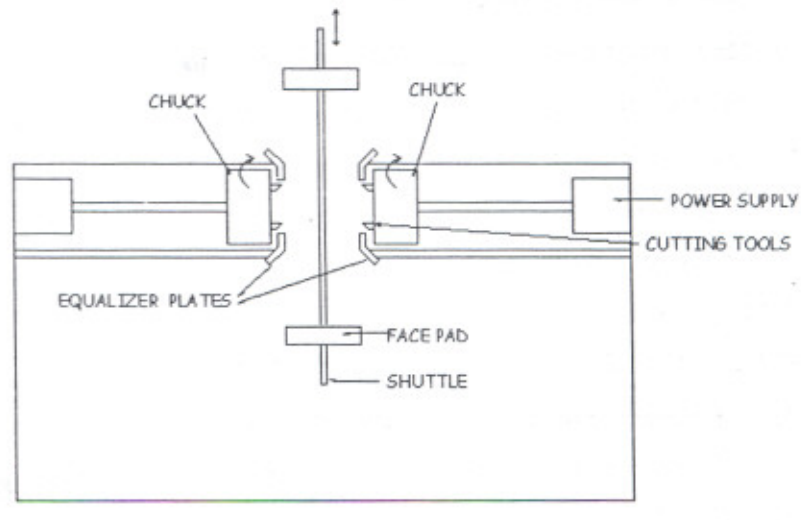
Face and Chamfer Machine – Equalizer Plates have been installed
